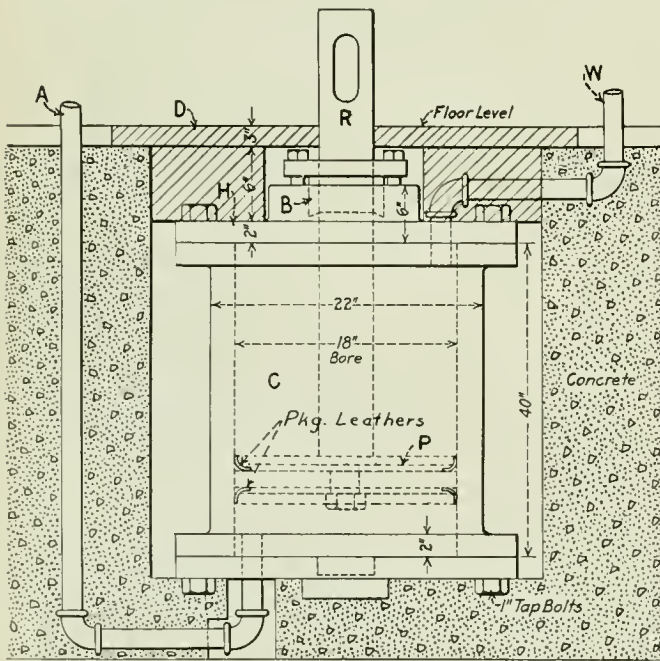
General Arrangement of Hydraulic Rod Bushing Press
